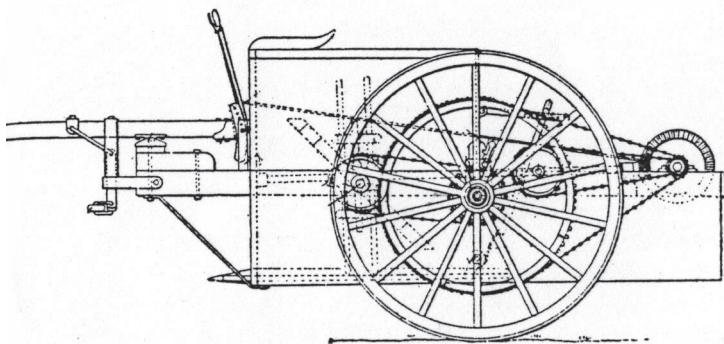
Drawing Showing Working Parts of Pritchard Machine.
